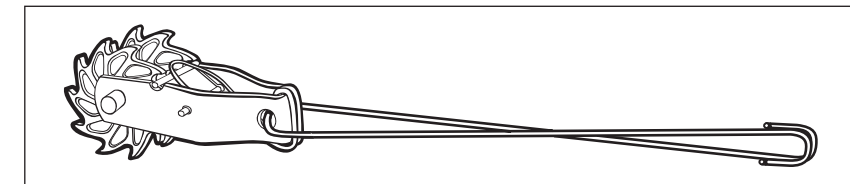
Squeeze ends of spring link together and push into spring assembly.
